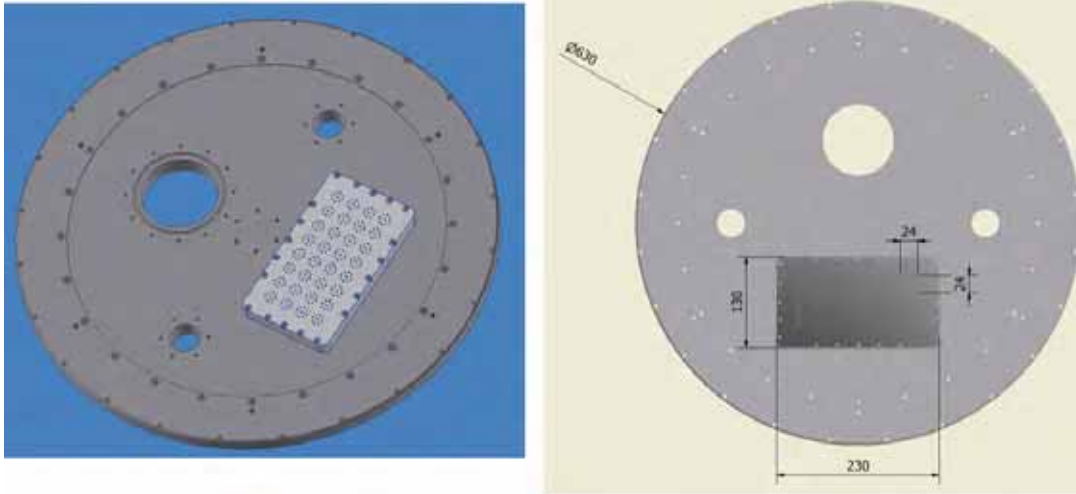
3D sketch of the cryostat backplate mounted with 32 vacuum waveguide feedthroughs on a mechanical flange (4x4 array configuration).
